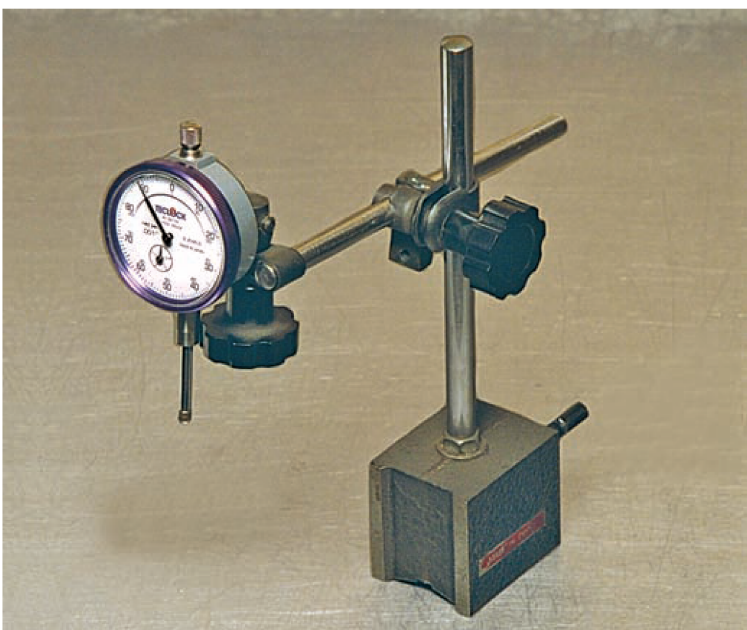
A dial indicator with a highly adaptive holding fixture
